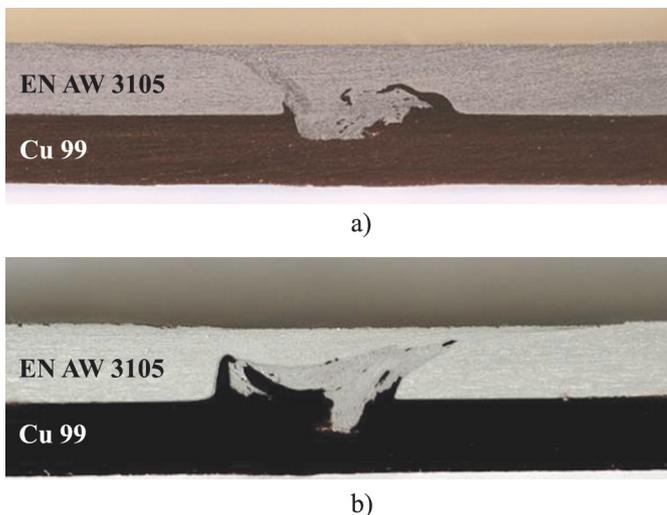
Macroscopic aspect of FSW weld for samples taken: a) at 60 mm from the beginning of weld; b) at 150 mm from the beginning of weld.
